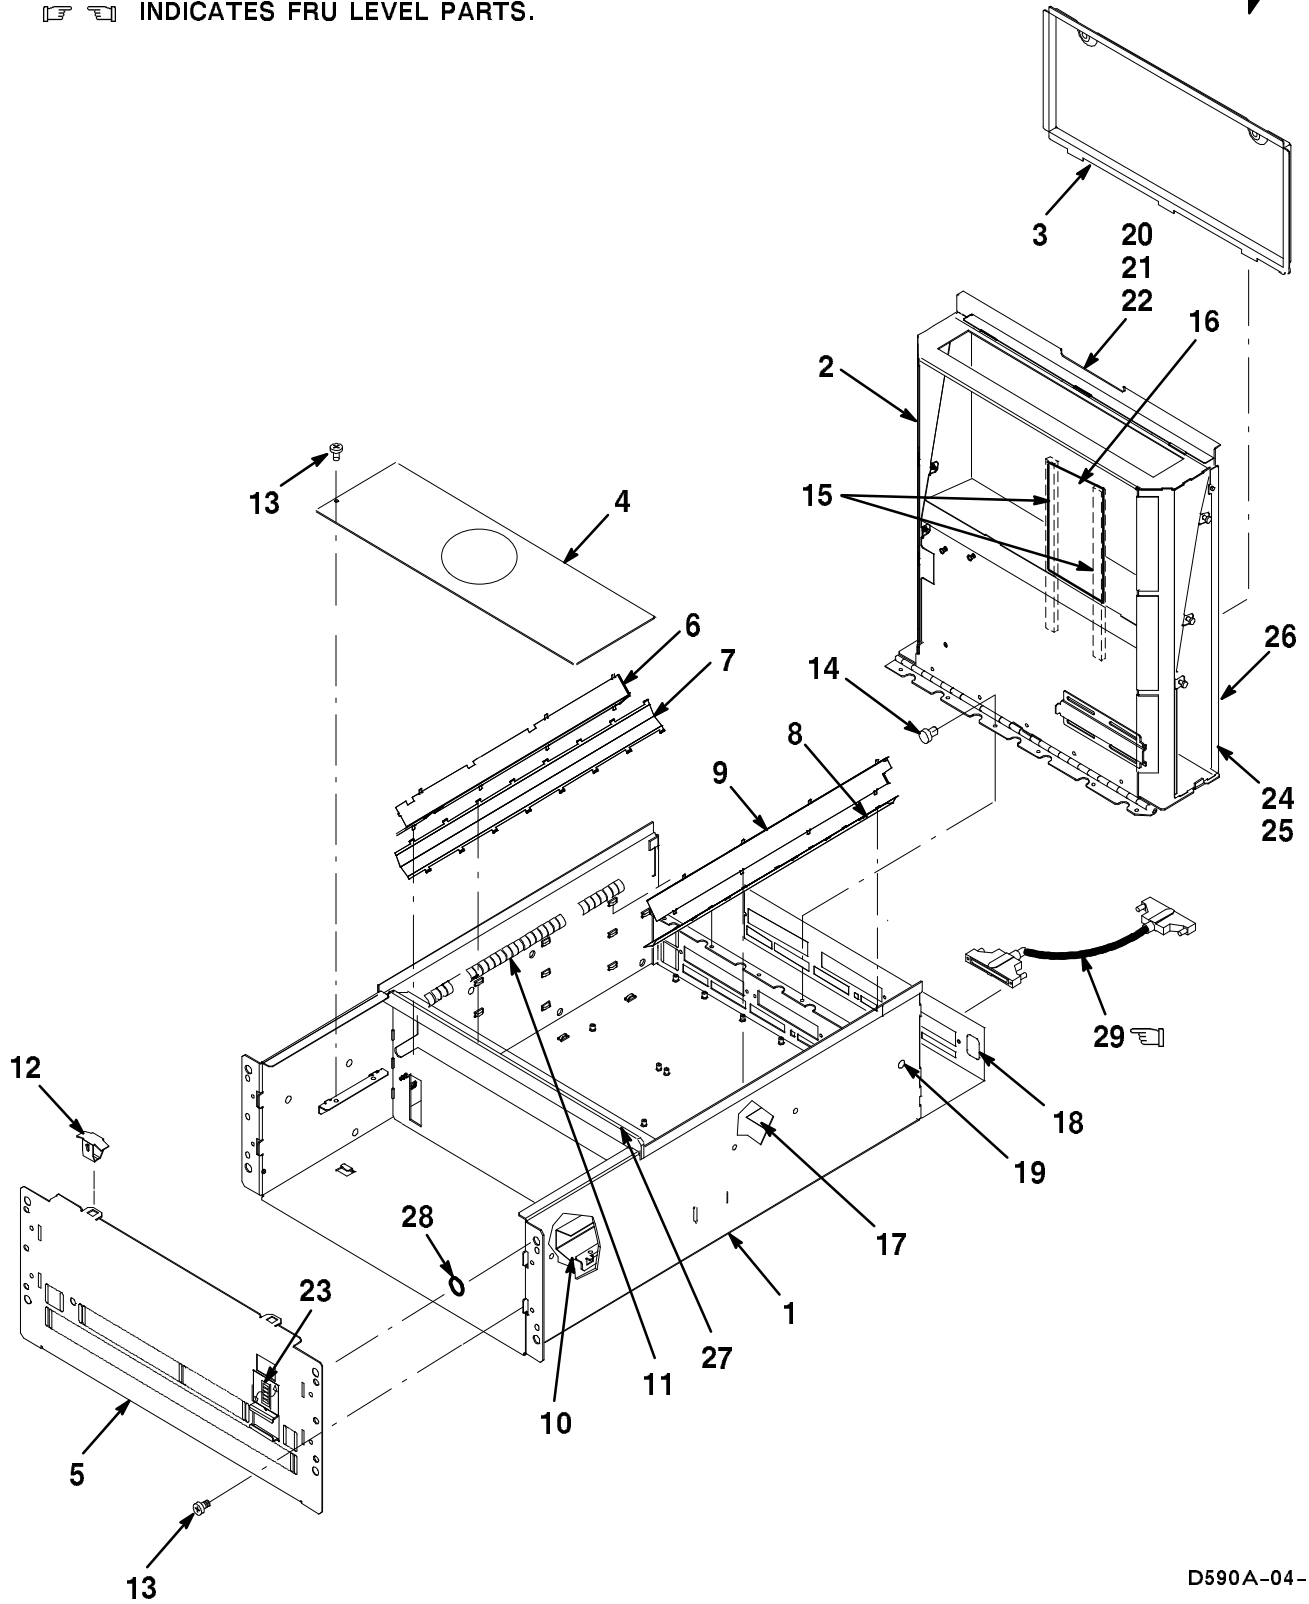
Drawer Assembly, CPU (Sheet 2 of 2)
